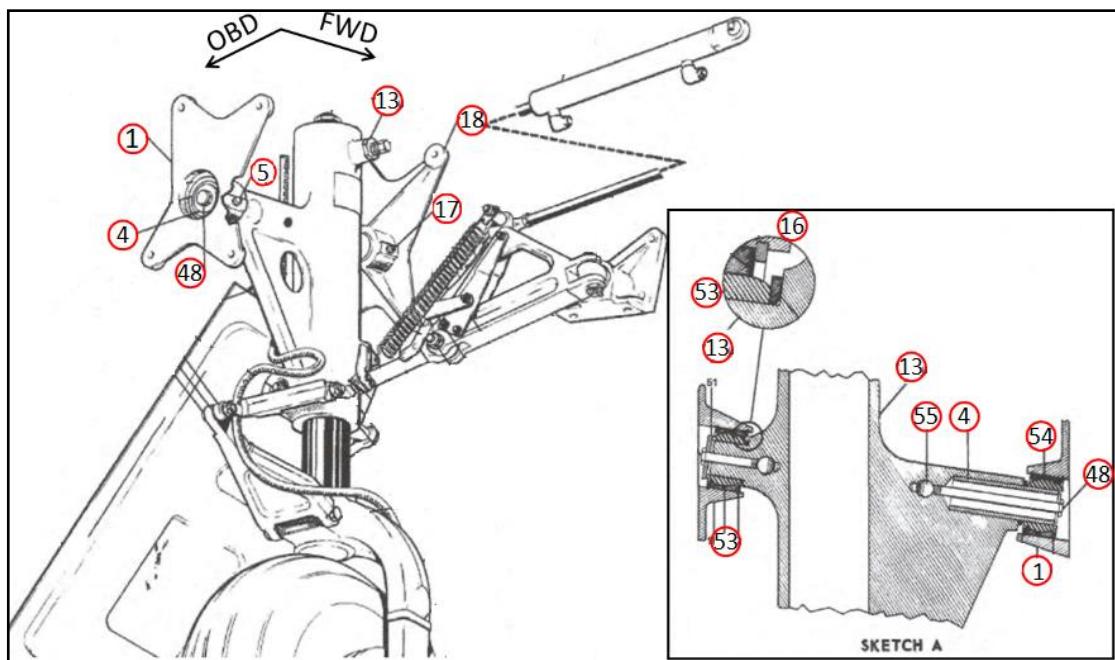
Main gear installation (Left-hand undercarriage shown, right-hand similar)
